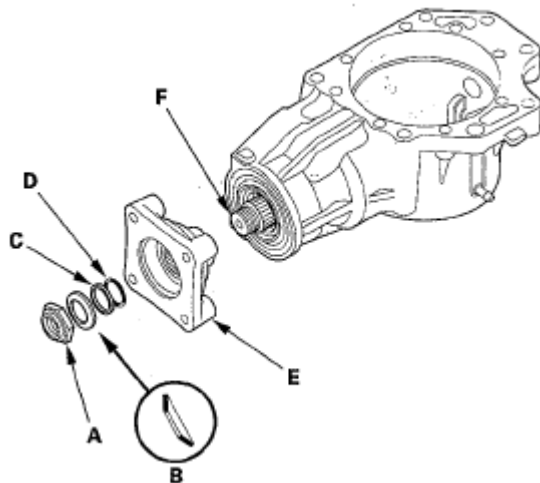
Identifying Locknut , Conical Spring Washer, Back-Up Ring, O-Ring, And Companion Flange
